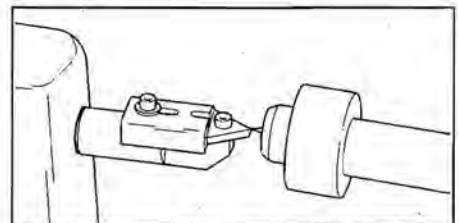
Check the alignment of the carbide cutter with the tailstock center.
